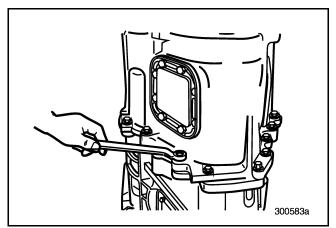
Removing Inner Rear Case-to-Main Case Capscrews
